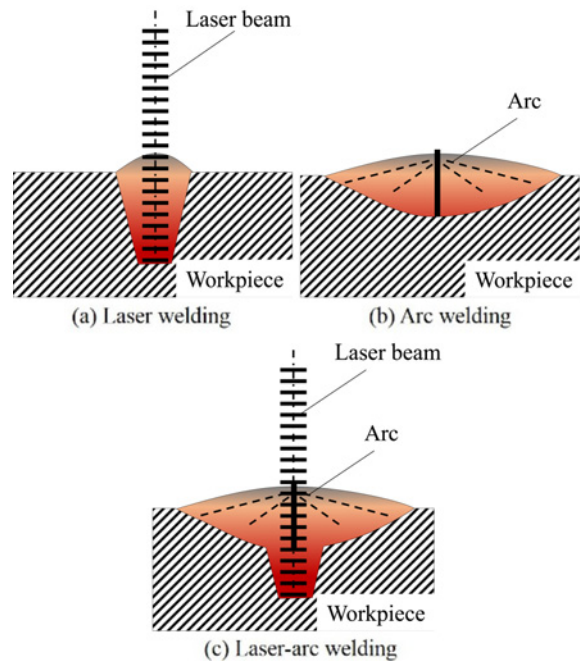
Comparison of (a) laser welding, (b) arc welding and (c) laser-arc welding
